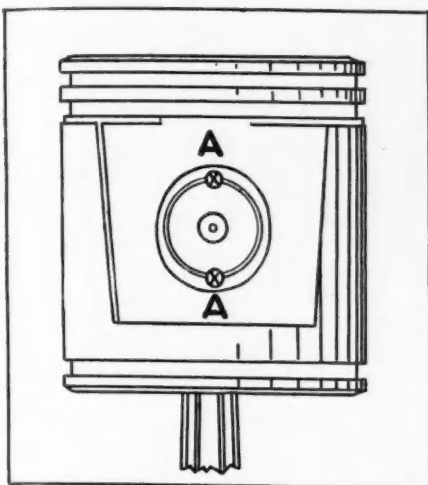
A relief, .015 to .018, in., must be filed or ground at the piston pin boss when new style piston pin locking is employed
